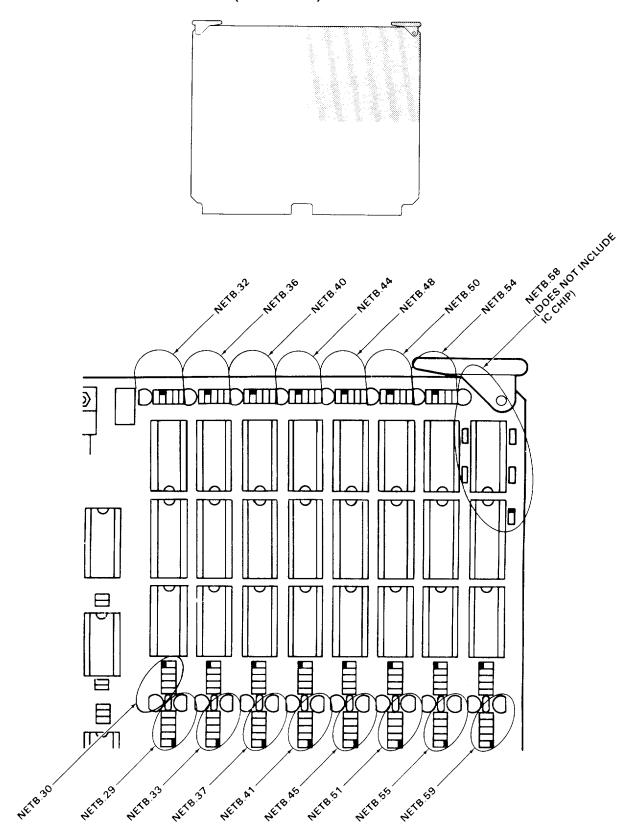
Driver/Sensor Component Layout (Sheet 3 of 4)
